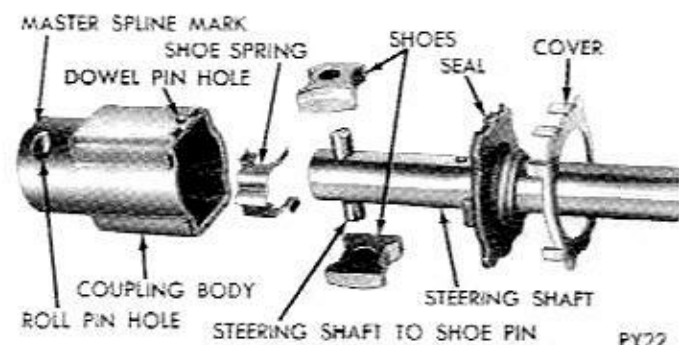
Steering Shaft "Pot" Coupling Disassembled
